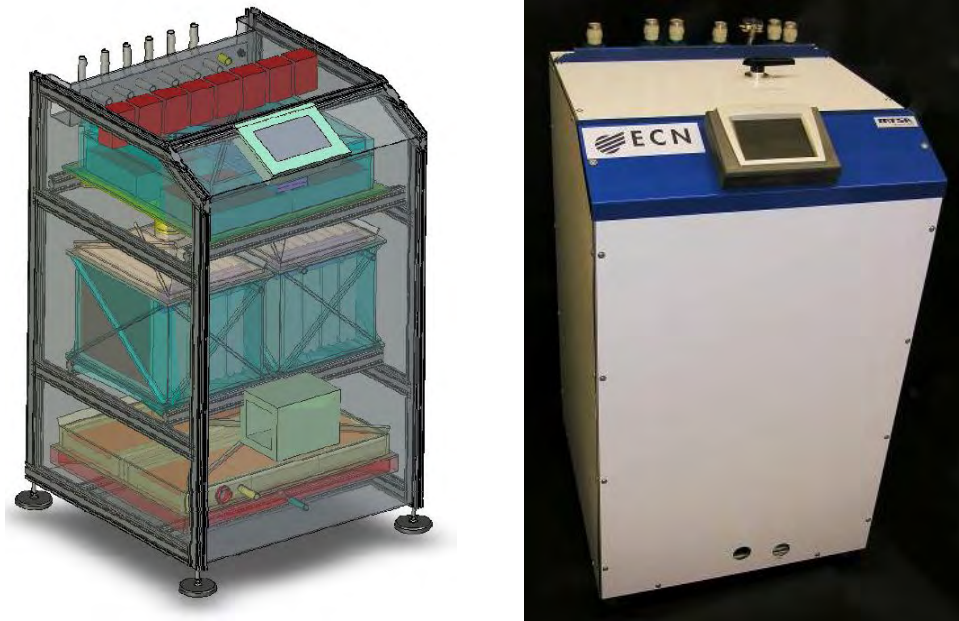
Design drawing and picture of the ECN 2.5 kW adsorption chiller
